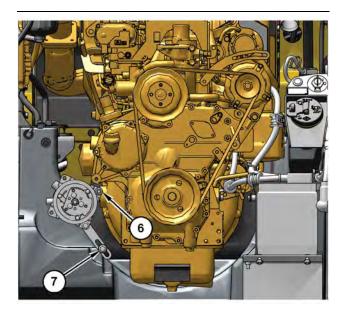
C3.8 (6) Mounting bolt (7) Adjusting bolt g06387520
